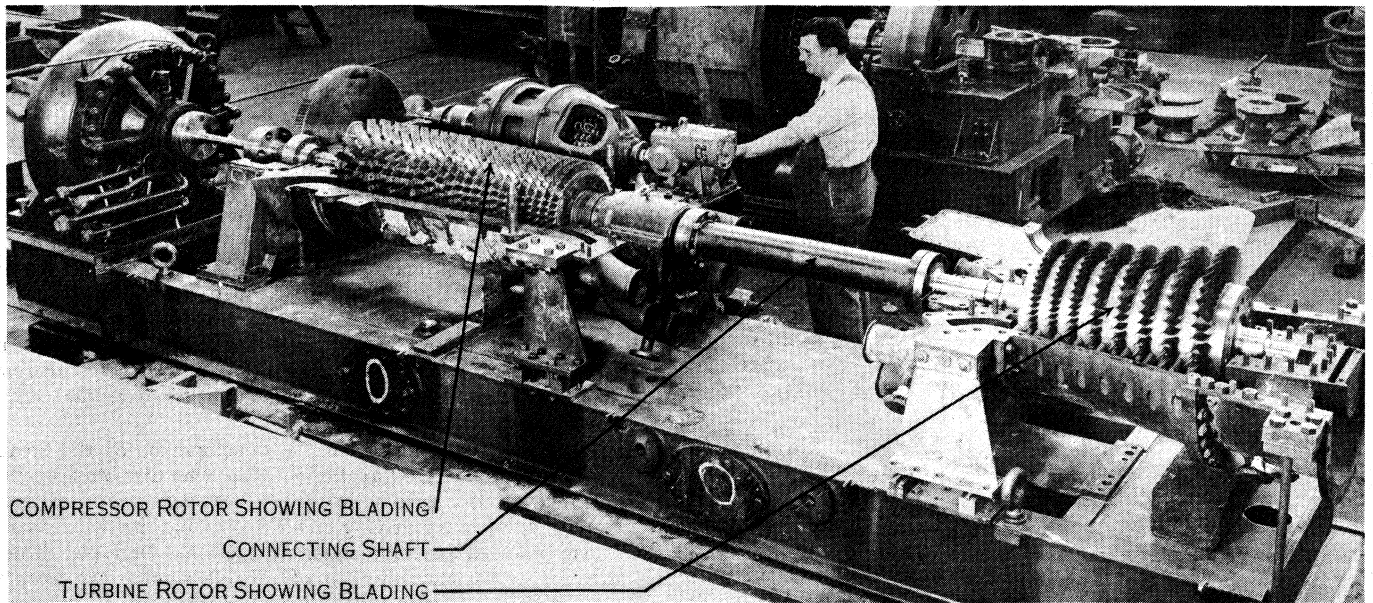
is a view of the exposed compressor and turbine rotor. The blading is clearly visible on both compressor and turbine elements. (For a discussion of turbine blading see TURBINE: STEAM.)
